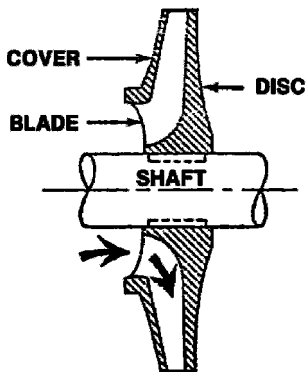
Cross-sectional view of an impeller. (*Dresser-Rand Company, Olean, N.Y.*)
